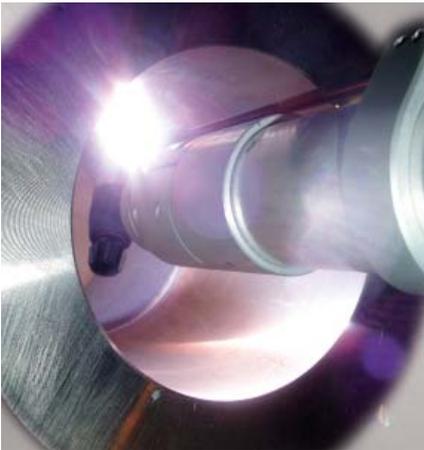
Internal coating less than 2 meters in length with simple-wire welding lance
